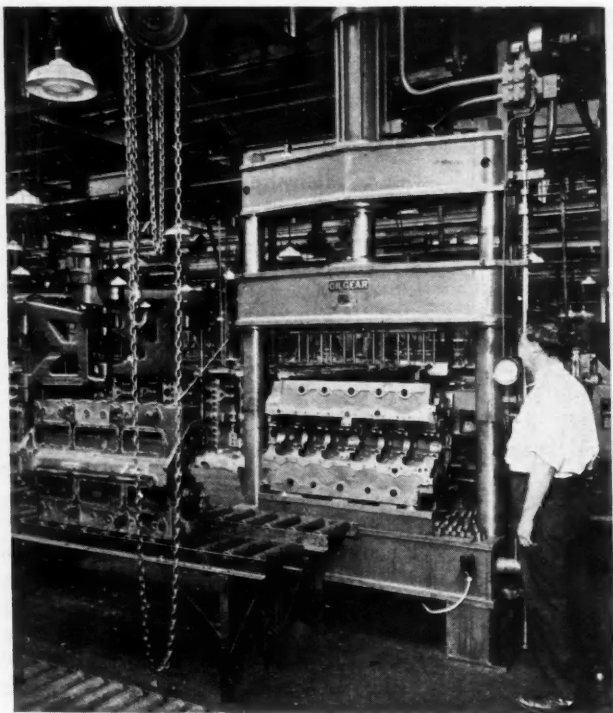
This Oilgear hydraulic press does triple duty in one setting. It broaches the guide holes in the block, presses in the guides and broaches the hole in the guide to a tolerance of 0.0007 in.
